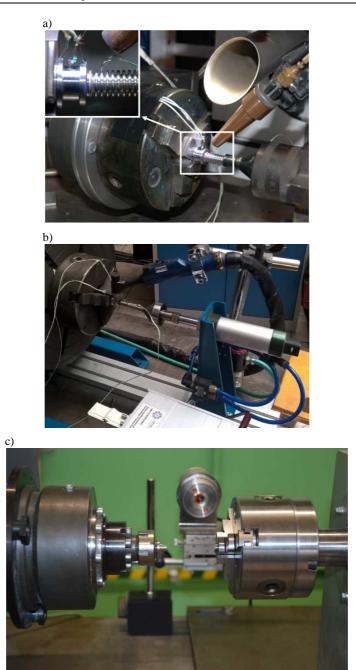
Welding setups: a) laser welding, b) plasma welding, c) high speed rotational friction welding
